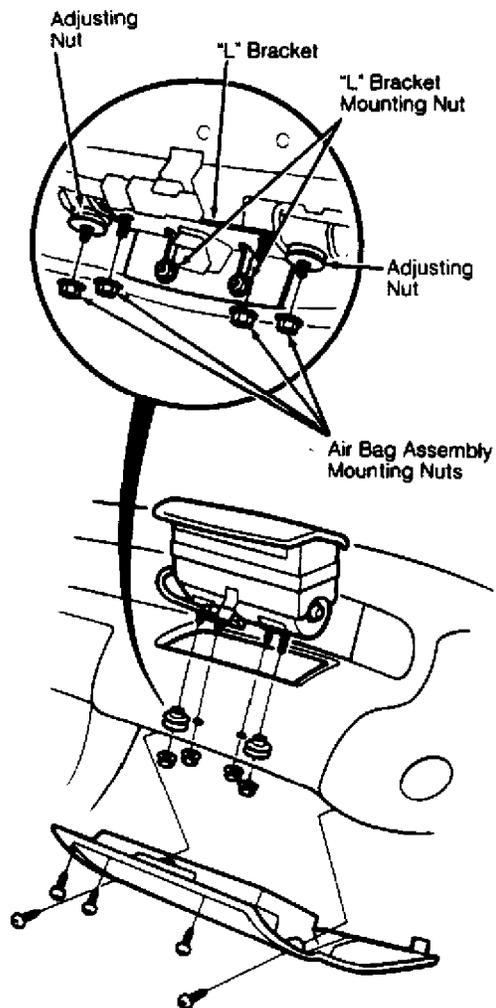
Removing/Installing Passenger-Side Air Bag (Prelude)
